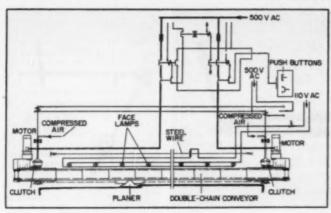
WIRING DIAGRAM for planer and conveyor drives.
